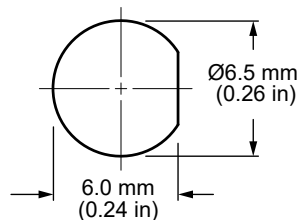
Recommended Mounting Hole Dimensions for the CSS-SGAF-050-STTN Cable Assembly
